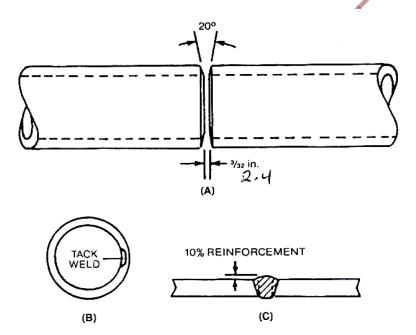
Small-diameter pipe joint preparation for 0.154-in. (3.9mm) maximum wall thickness section. (A) Joint preparation and alignment of pipe. (B) Tack-weld pipe joint. (Note that tack welds are never full-section welds.) (C) Cross section of completed weld.
